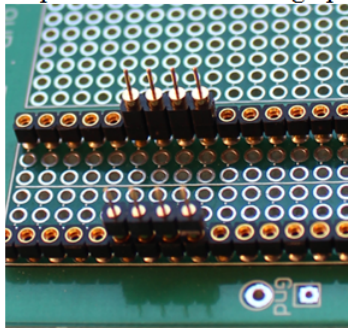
4-Pin Length Terminal Strips Inserted in DIP Socket
